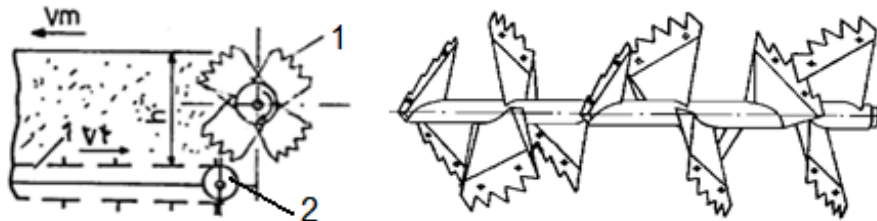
Spreading machine with a beater arranged horizontally [69]
